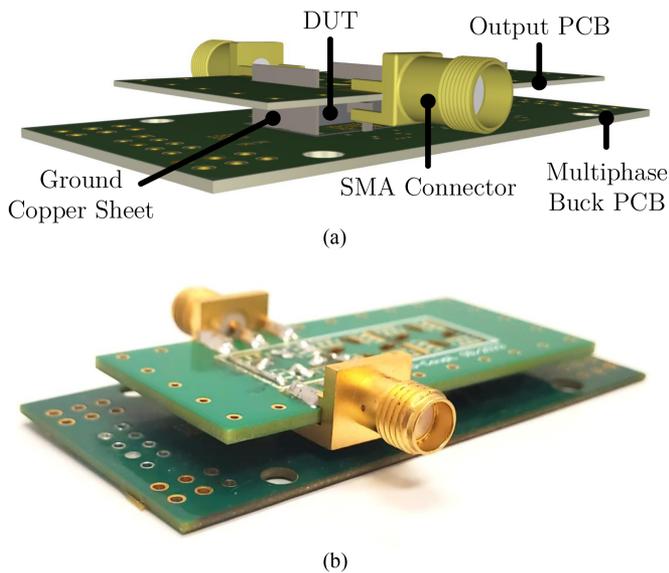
(a) Altium 3-D Rendering of the test fixture assembly and (b) fully assembled test fixture with DUT in place. The DUT is connected to the multiphase buck board used in the Mini-LEGO converter. An output board is designed and connected to the DUT and ground copper sheets. Two SMA connectors are placed on the output board and used to interface with the VNA to conduct the measurements.
